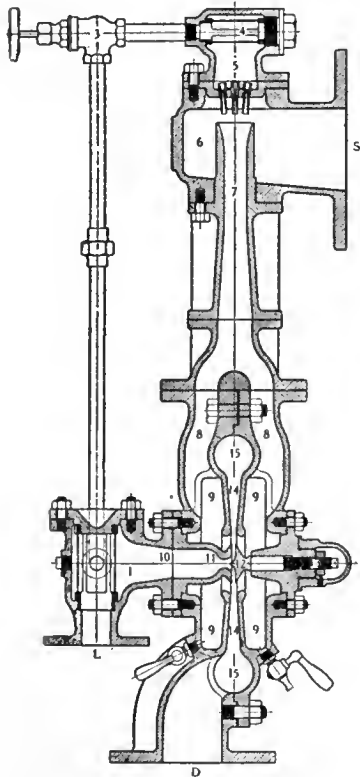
CROSS-SECTION OF STEAM-EJECTOR CONDENSER AIR PUMP
